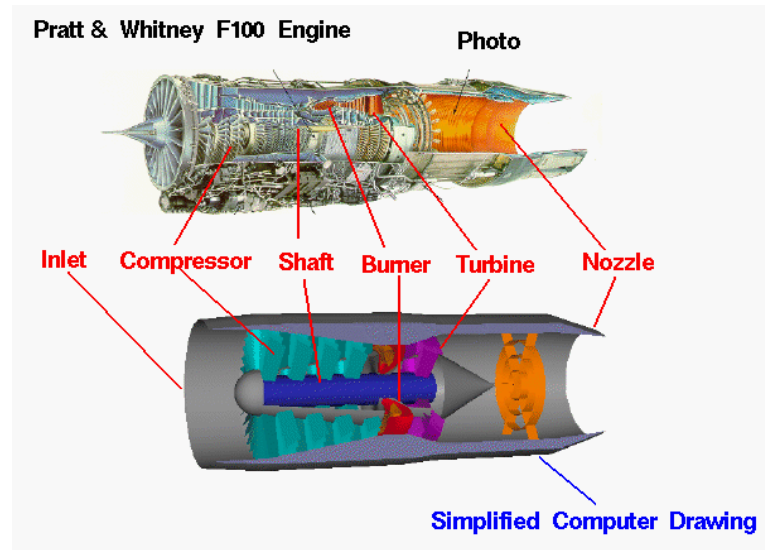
Schematics showing different parts in a typical gas turbine engine [Ref. 4].
